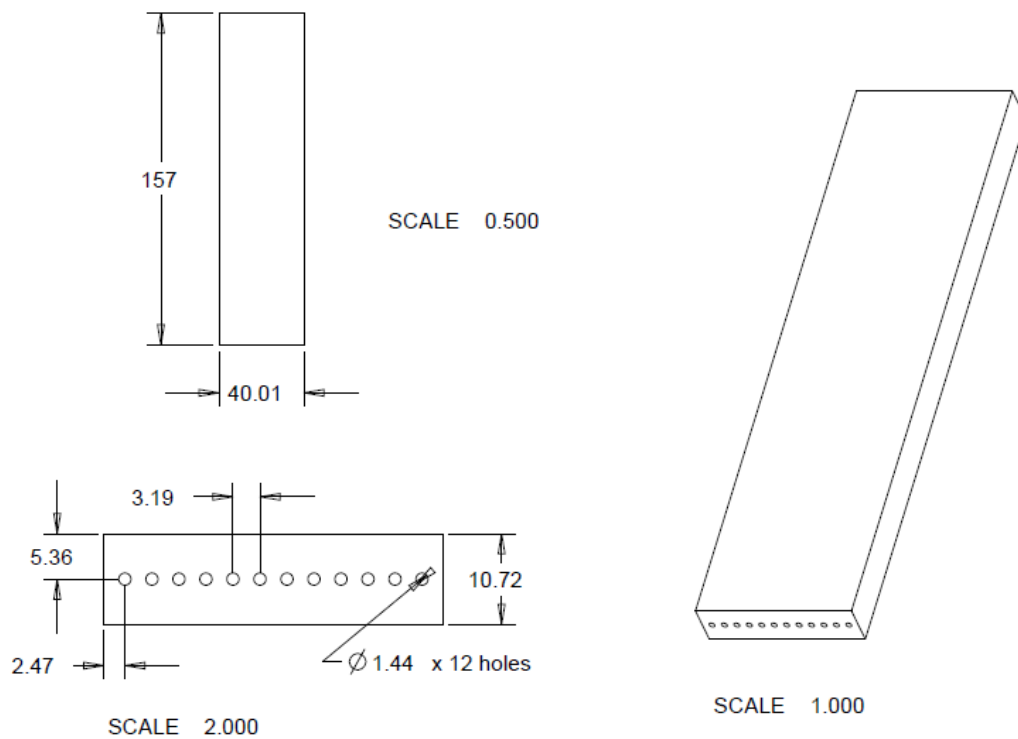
Engineering drawing of the microchannel heat exchanger. All dimensions are in millimeters.
